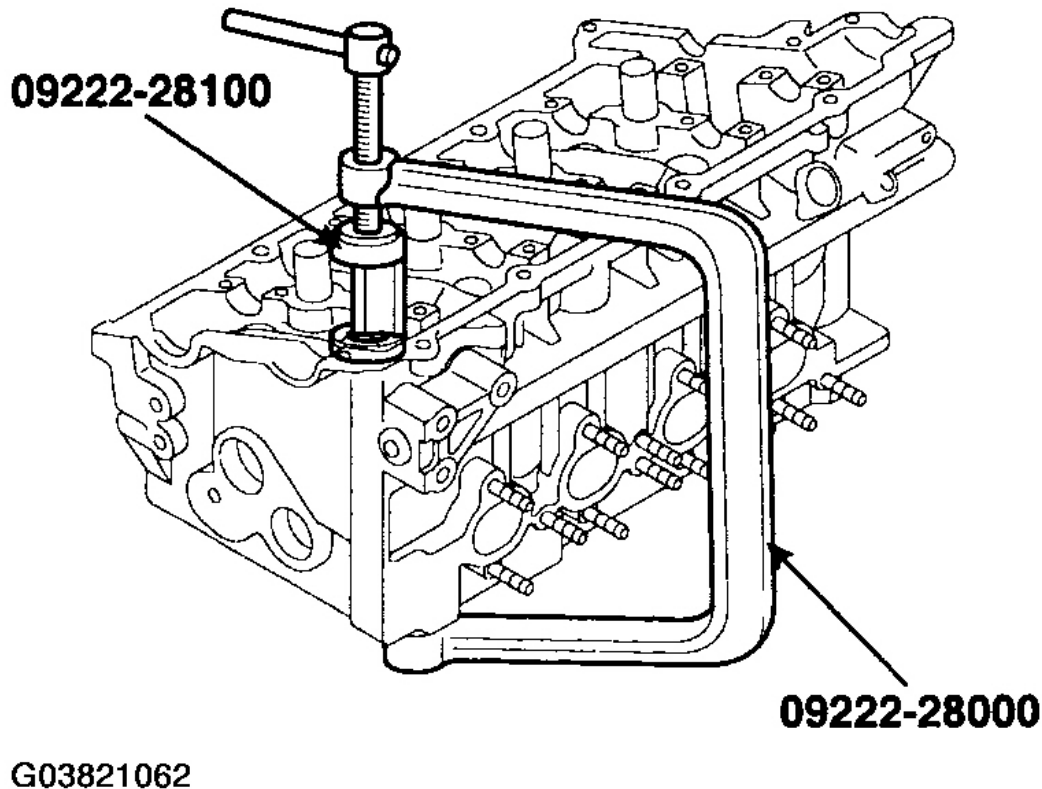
Compressing Valve Spring And Removing Retainer Lock
